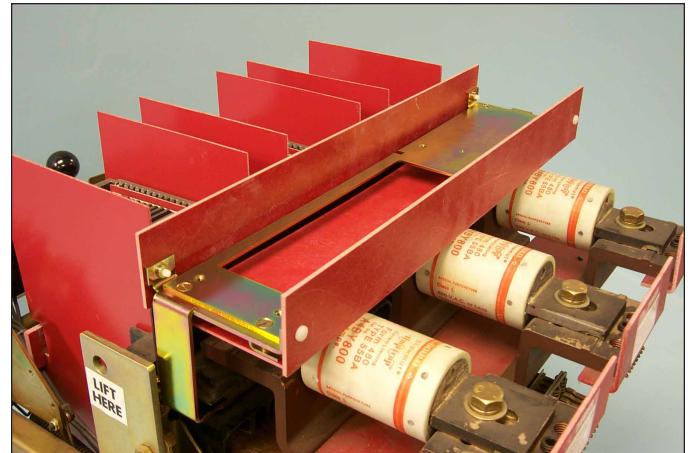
Rear Aux. CT Module Insulation Barrier Installed on the Mounting Brackets.
